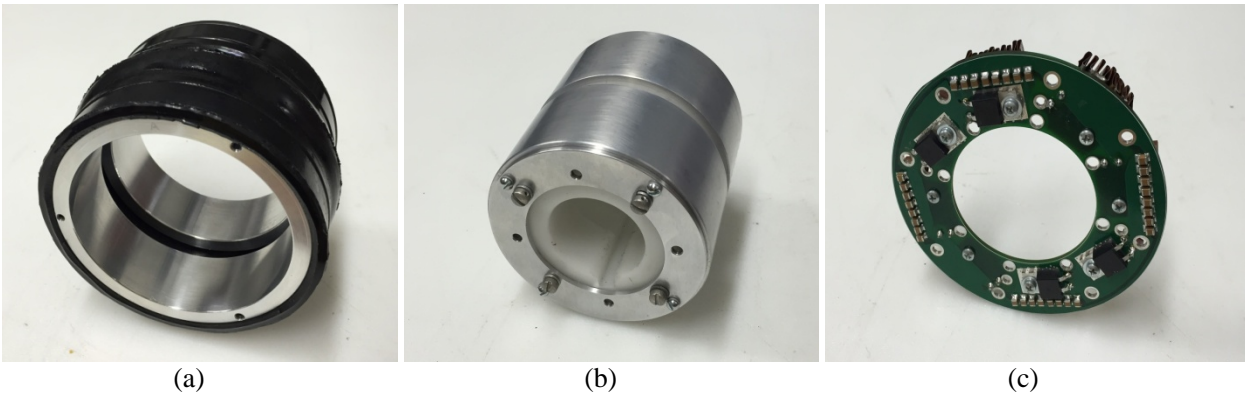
Coupling capacitor stator (a), rotor (b), and rectifier board (c), which comprise the capacitive power coupler assembly.
